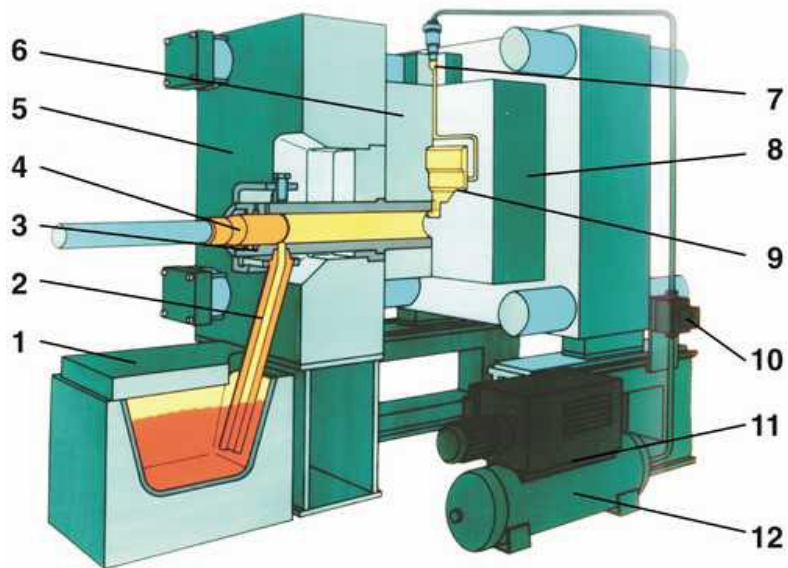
Vacural die casting machine (VDC320t: Müller Weingarten).
